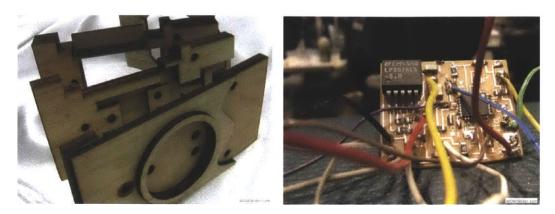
Left. Cherry Wood laser cut layers of the camera body splayed out. Design lead was UROP Melodia Kao. Right. The motherboard of the camera hand soldered and CnC milled guided "by hand" on fiber backed copper.
